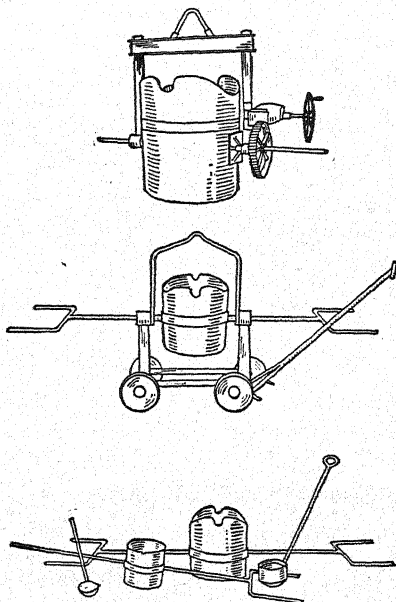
Typical ladles used in foundry practice. (After Stoughton.)
